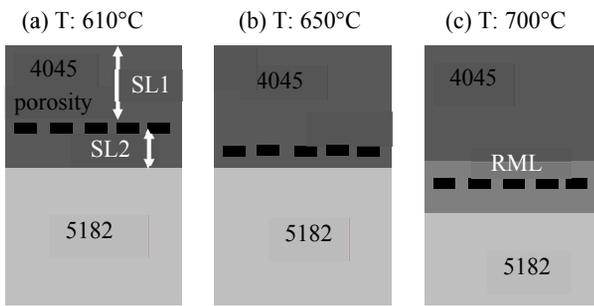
schematic illustration of porosity occurred at the three layers clad strip shown in Fig. 11. T: poring temperature of 4045 molten metal, SL1: solidified layer by the lower roll, SL2: solidified layer by 5182 strip, RML: re-melted and reacted layer
